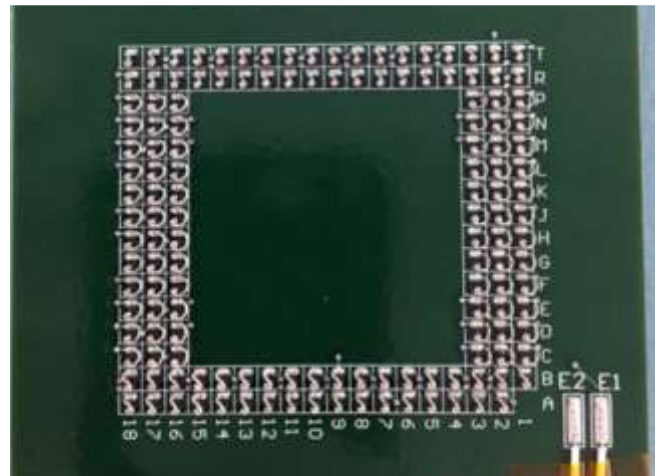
Jumper-wire soldered to floating package pin and soldered to a surface-mount pad on the PCB.
